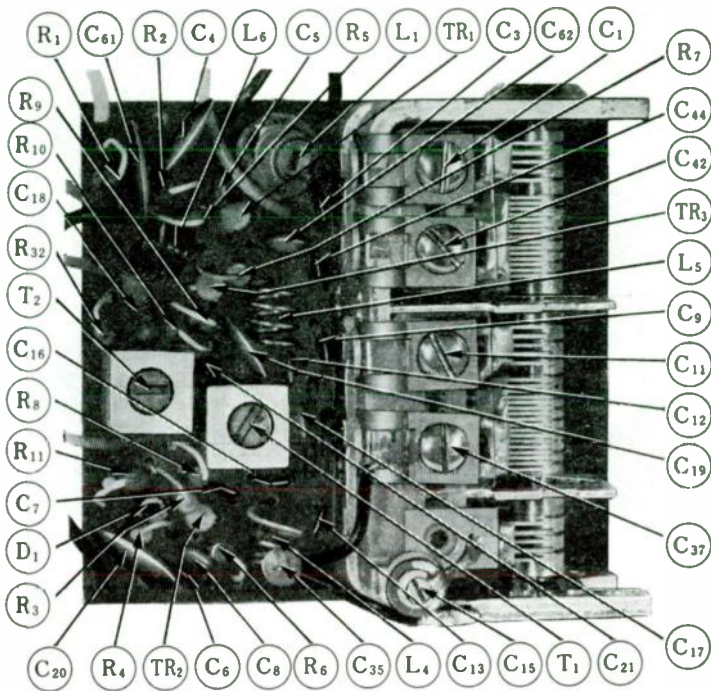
A-Component View parts identification, FM RF section. Courtesy of Panasonic.
